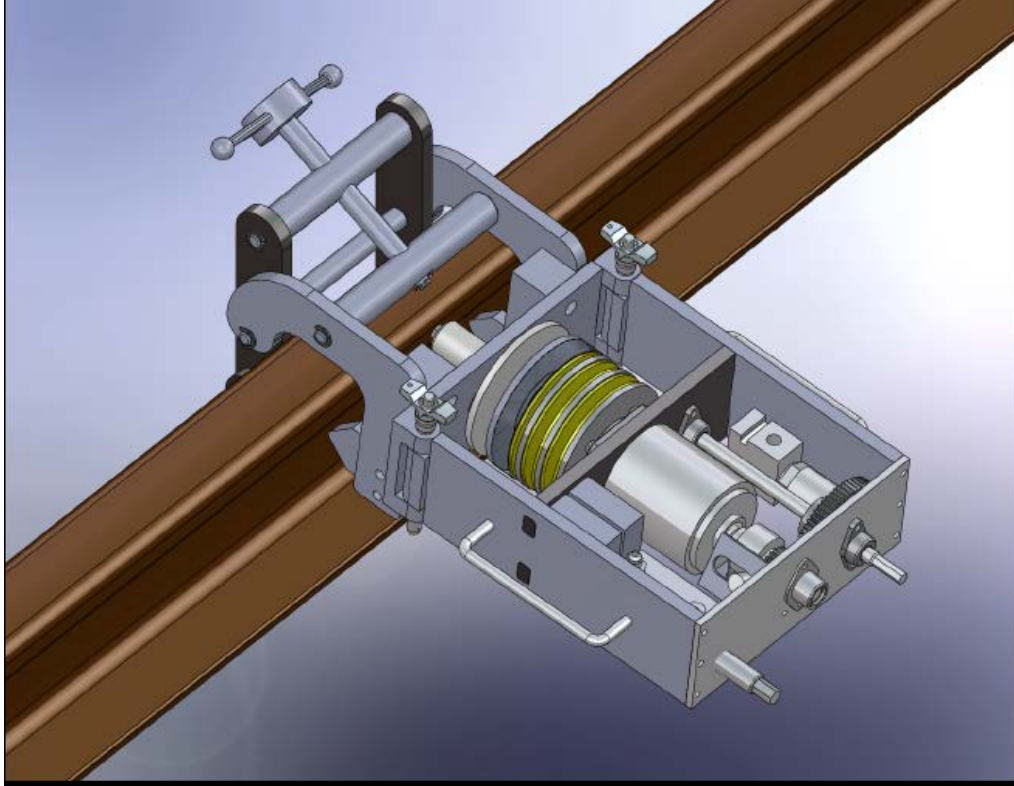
Isometric View of Portable Inertia Friction Welder
